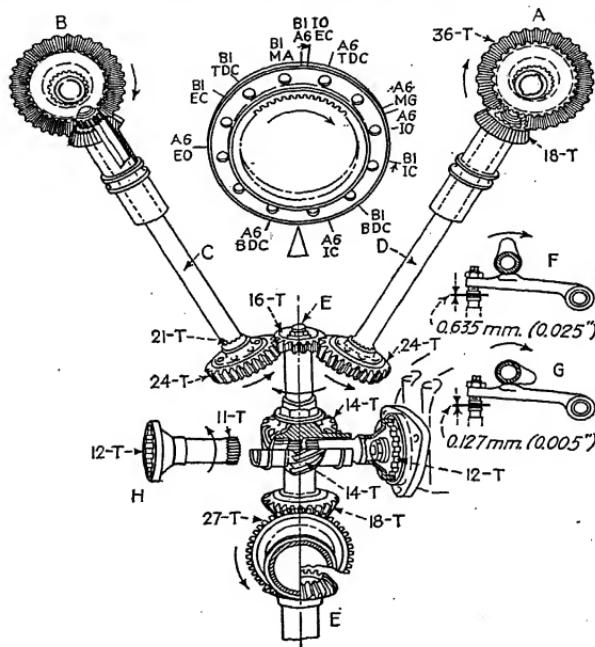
Diagram of valve gearing to be used in timing engine.
